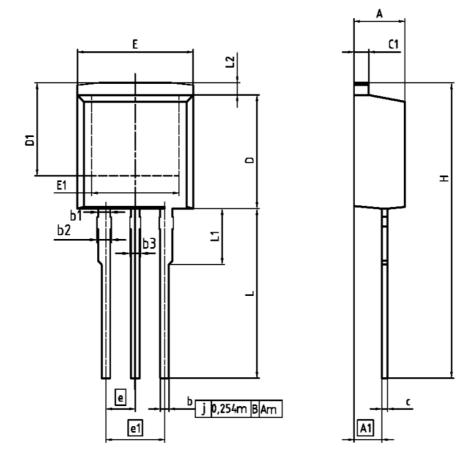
Outline PG-TO-220 FullPAK dimensions in mm
